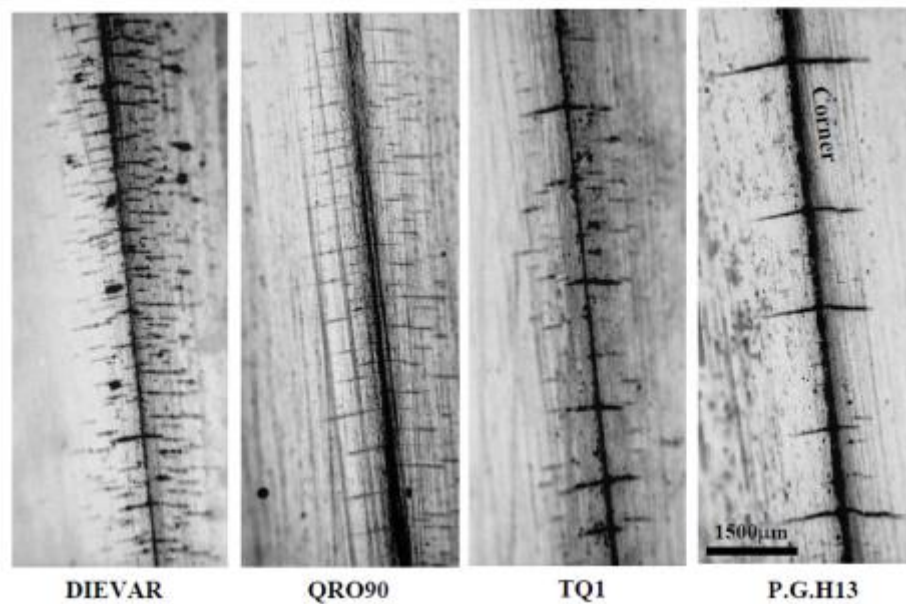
Typical thermal fatigue test corner cracking on various commercial monolithic H13 tool steel specimens.
